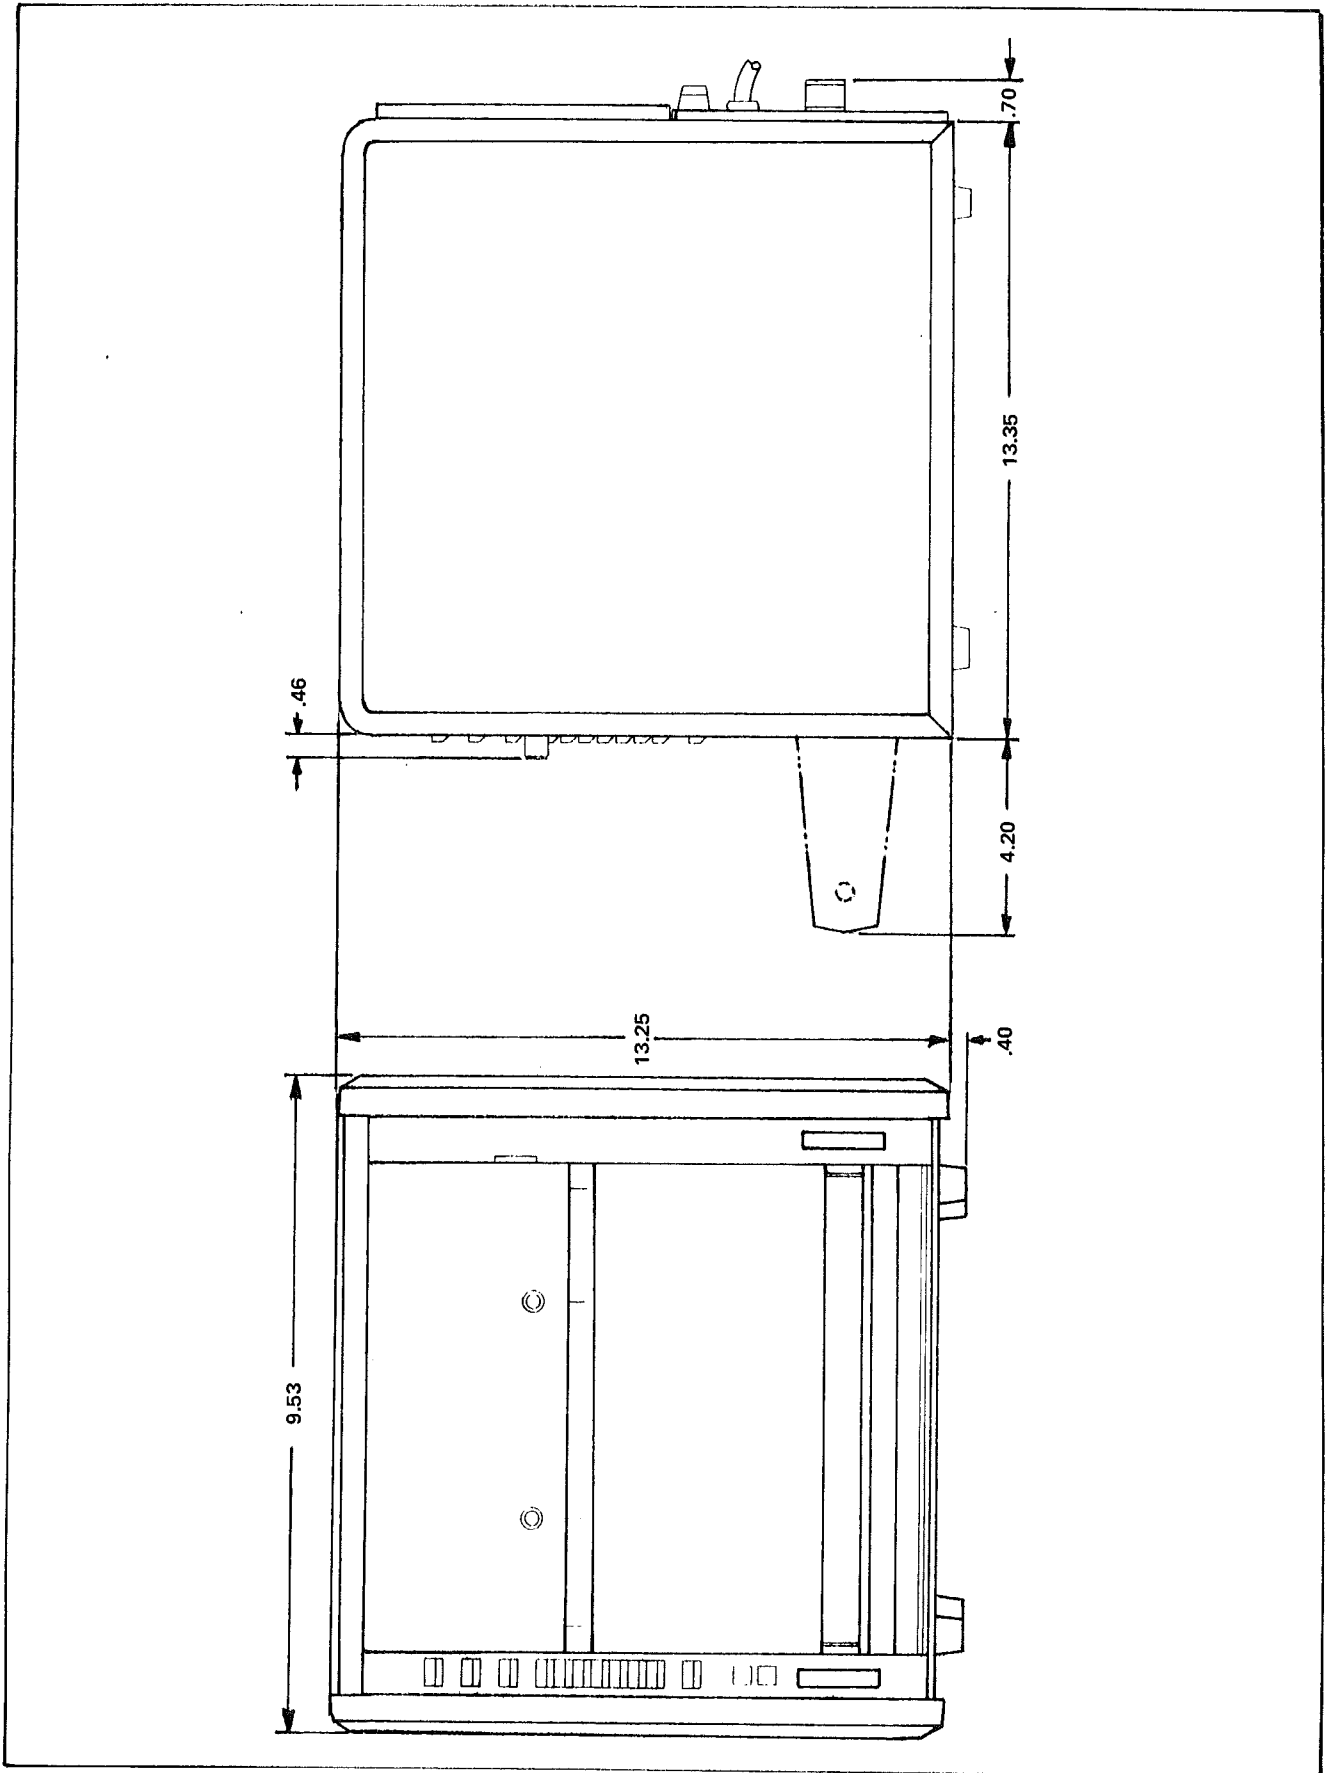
OUTLINE DIMENSIONS - 2200 SERIES
